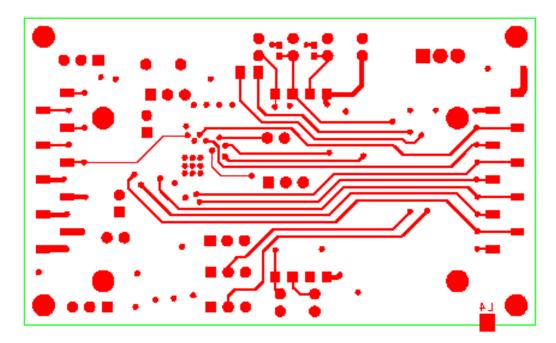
73S8023C Demo Board Bottom Signal Layer
